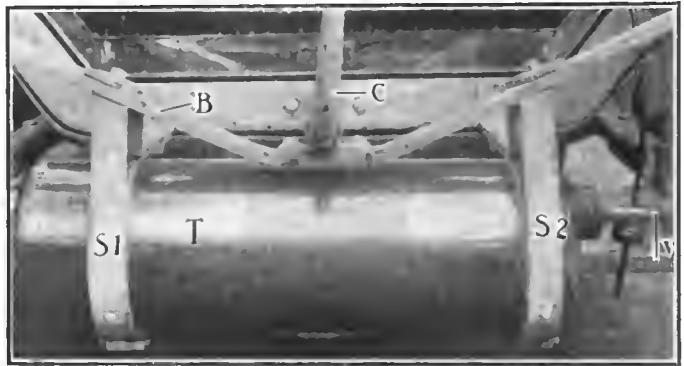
Front view presenting method of holding the acetylene tank in a position which clears the starting crank
